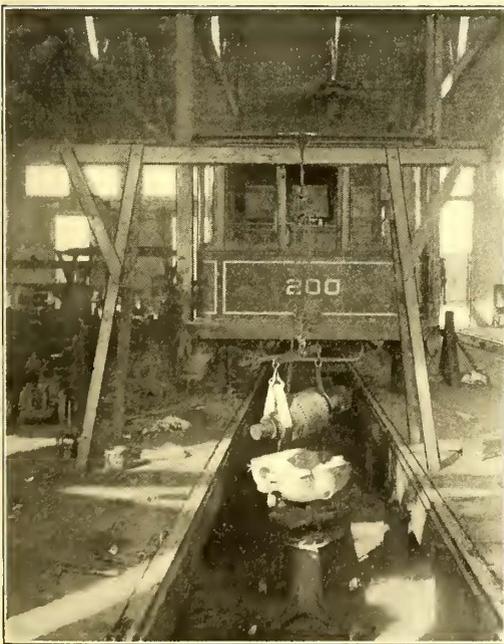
CAR REPAIR SHOP, SHOWING METHOD OF REMOVING ARMATURE
